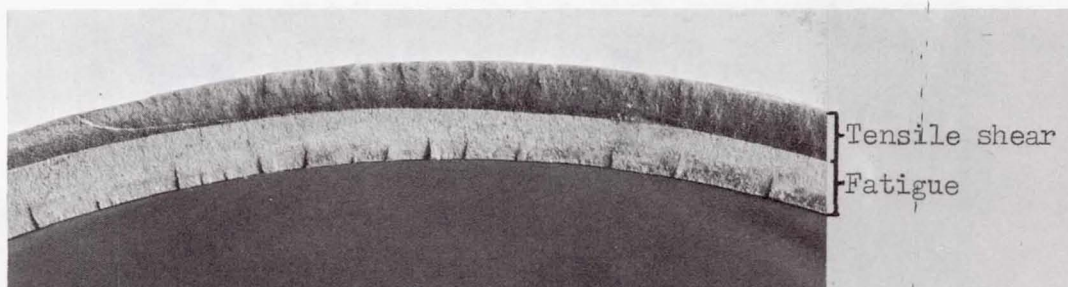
A portion of the fracture in the torque cylinder shown in figure 3. The remainder of the fracture was similar in appearance. X 3.
